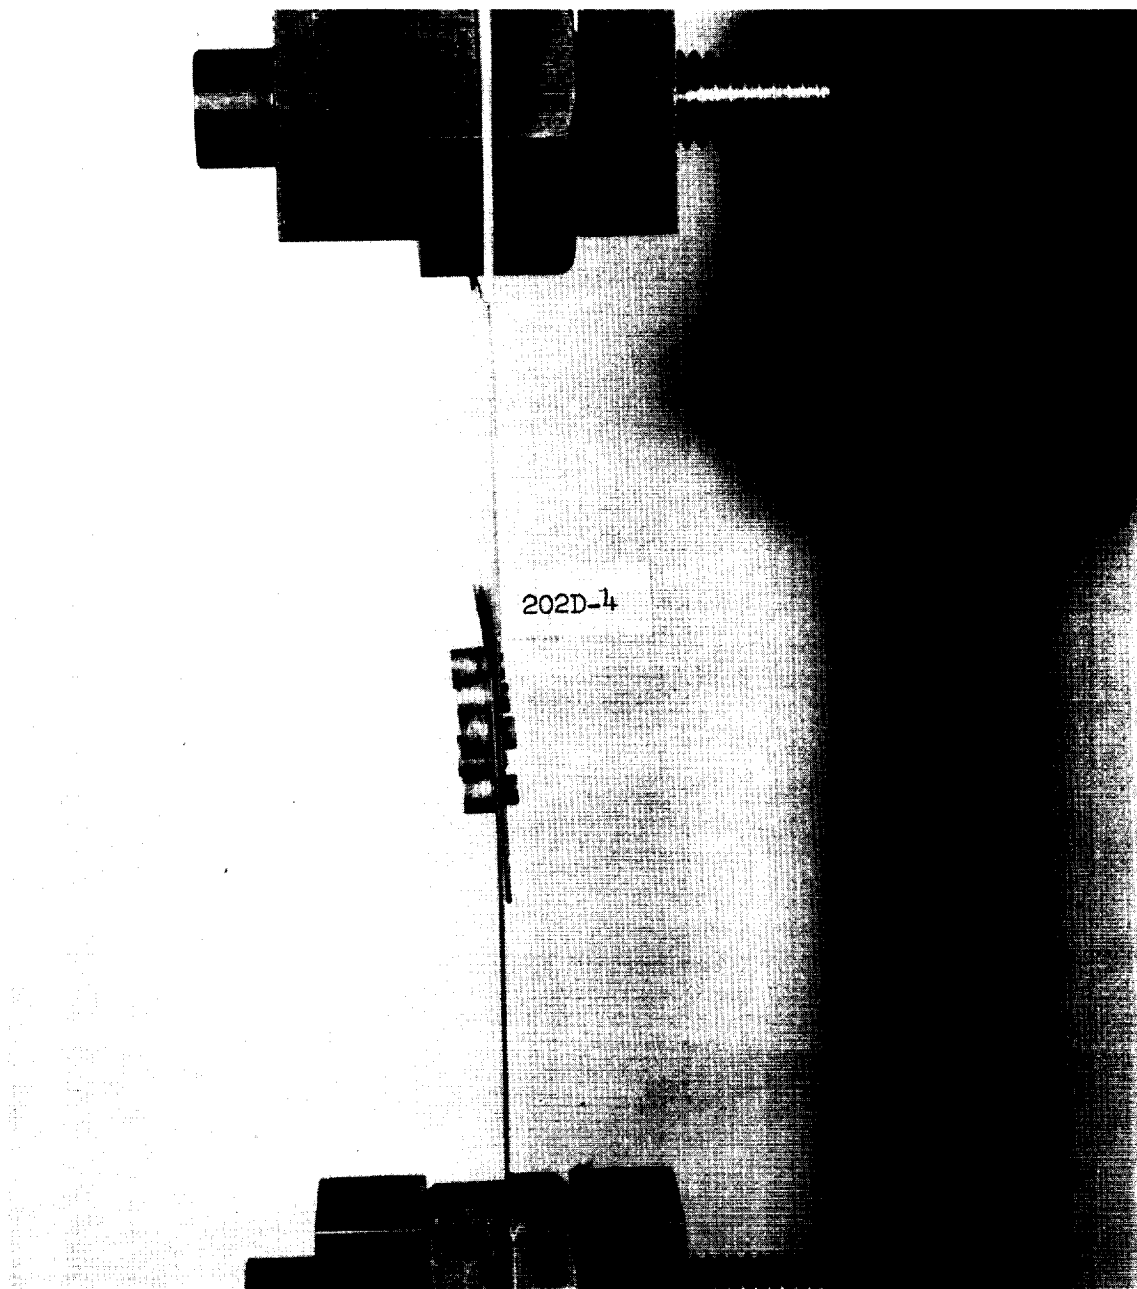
TYPE IID SPECIMENS - 0.060-INCH MATERIAL - BERYLLIUM RIVETS
